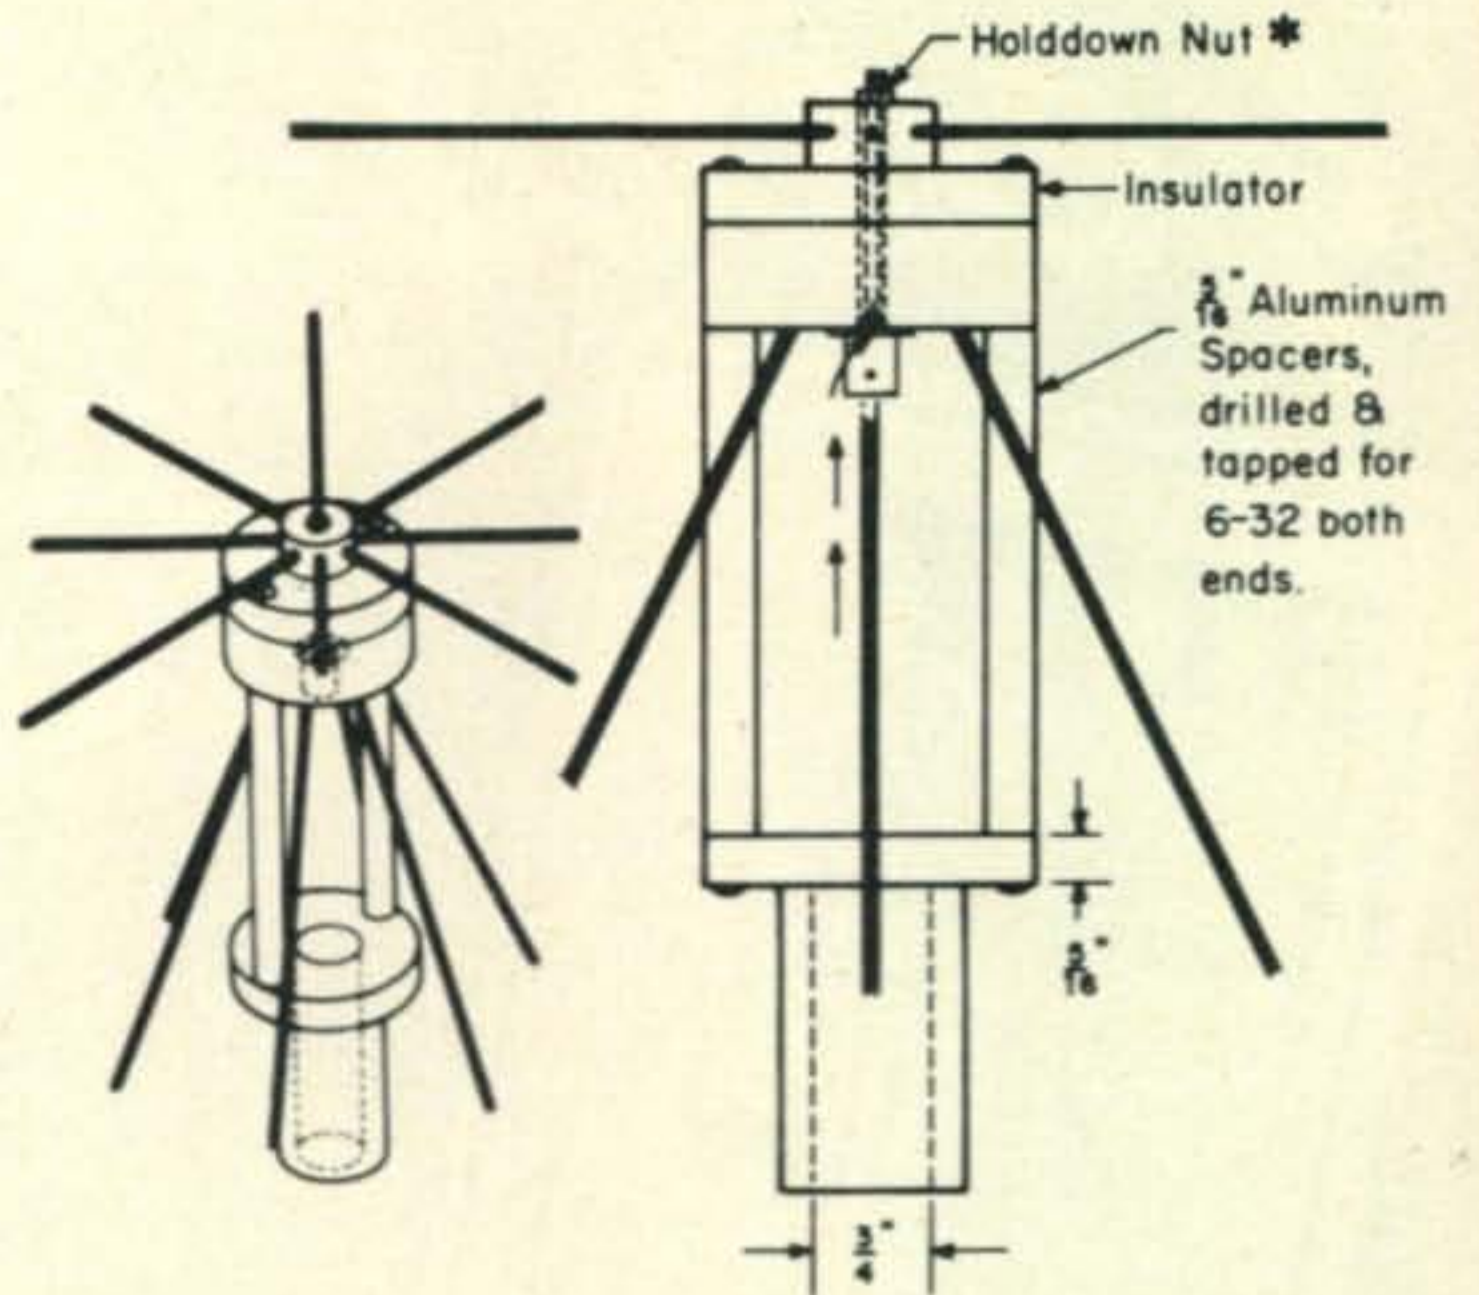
The complete LSD discone assembly. An aluminum pedestal mounted on two 5/16" dia. spacers fits inside 1 1/8" aluminum tubing used as a mast. The coaxial feedline may be run inside the mast. The holddown nut fastening the disc element to the cone threads onto a 6-32 brass screw soldered to the center terminal of the BNC connector.
